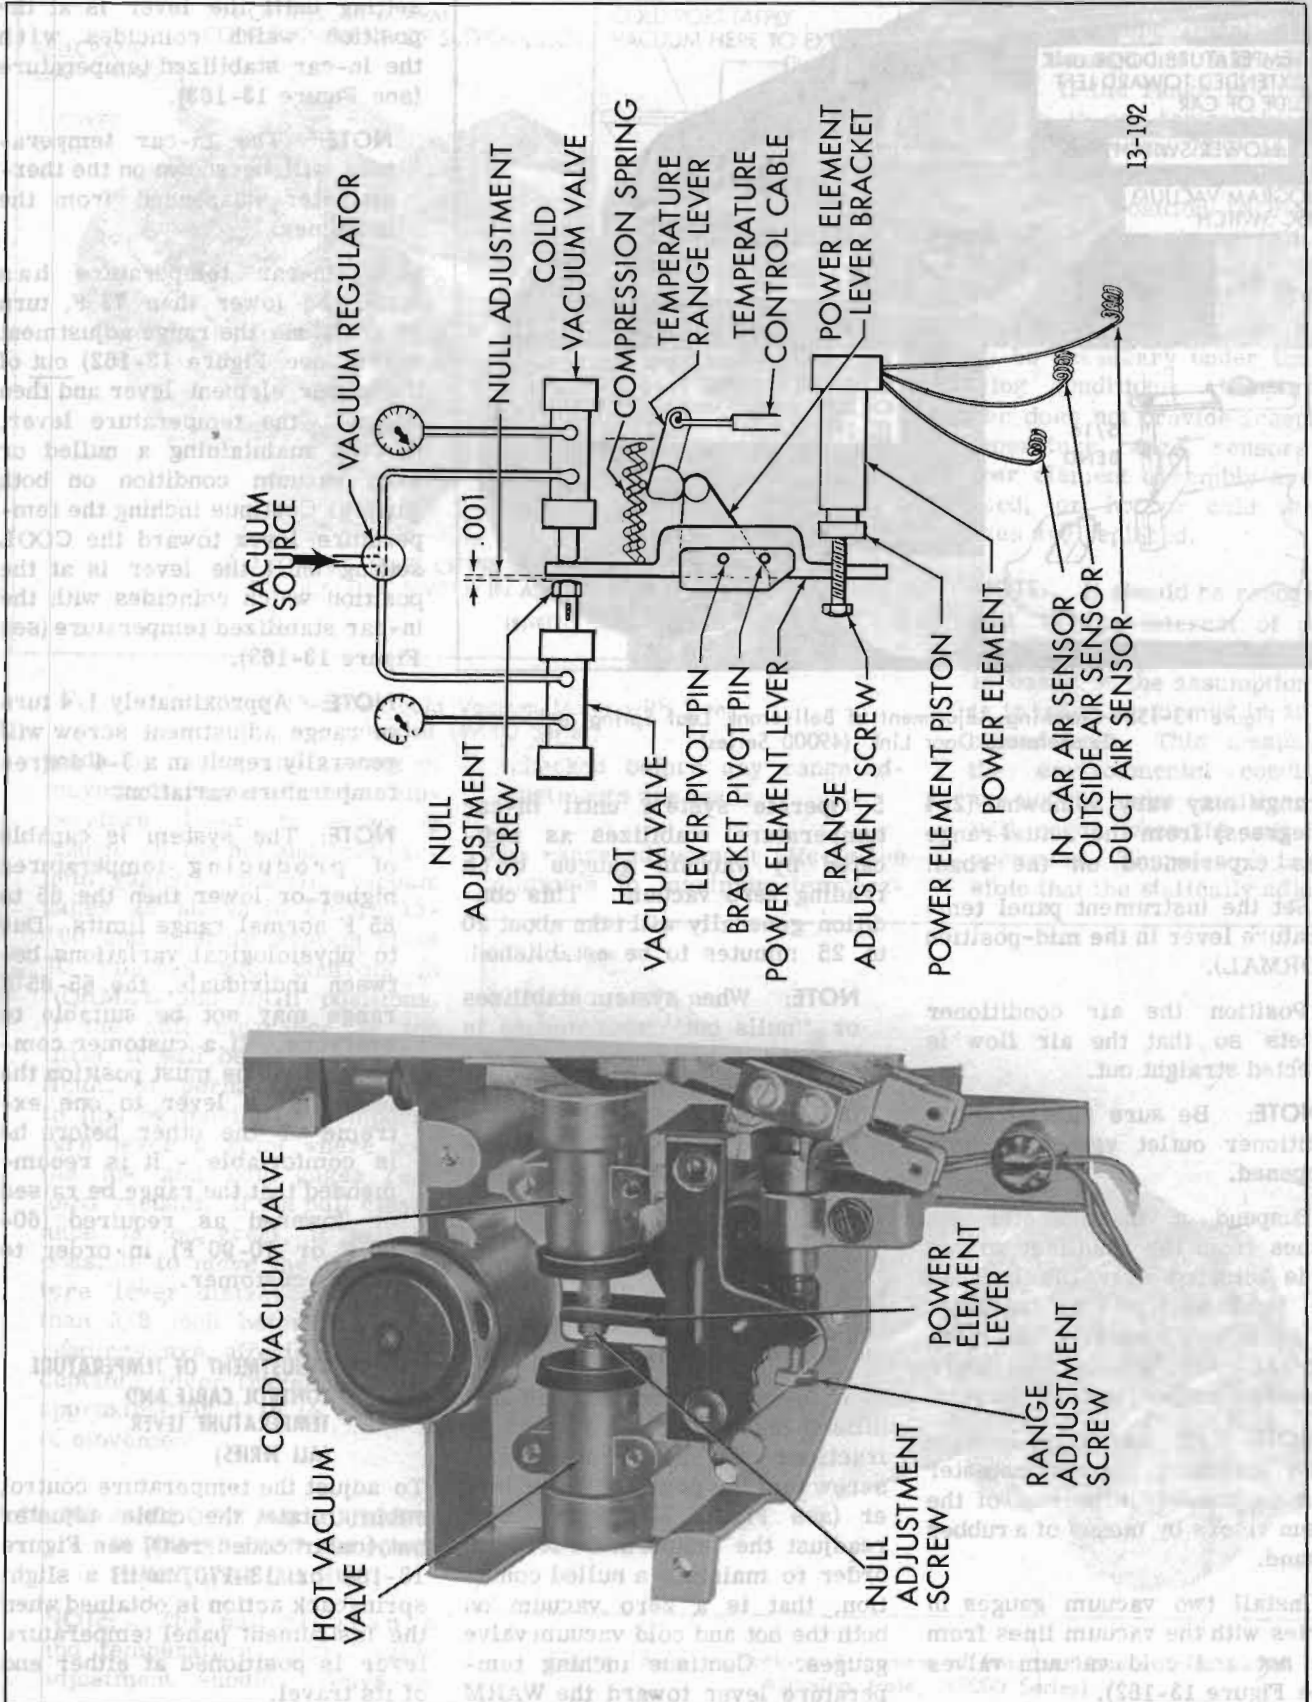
Hot and Cold Vacuum Valve Null Check and Adjustment Setup (All Series)
